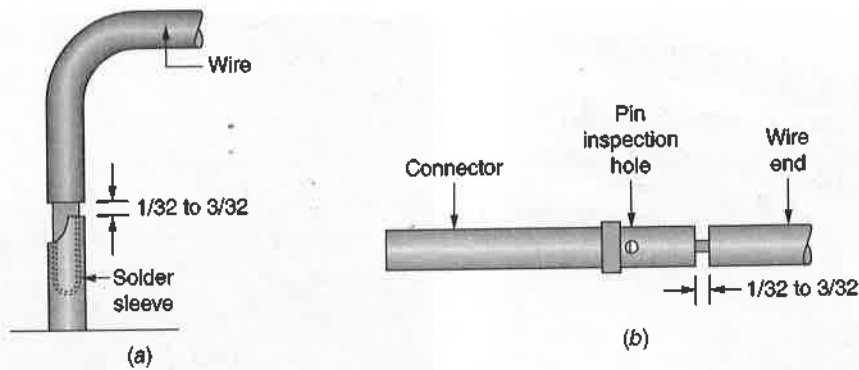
Wire strip lengths: (a) In the case of a solder pot connection, the wire should be long enough to reach to the bottom of a solder cup, with $\frac{1}{32}$ to $\frac{3}{32}$ in. of wire exposed beyond the cup; (b) The wire in a crimp connection should be visible in the inspection hole of the crimp contact, with $\frac{1}{32}$ to $\frac{3}{32}$ in. of wire exposed beyond the barrel. (The Deutsch Co.)
